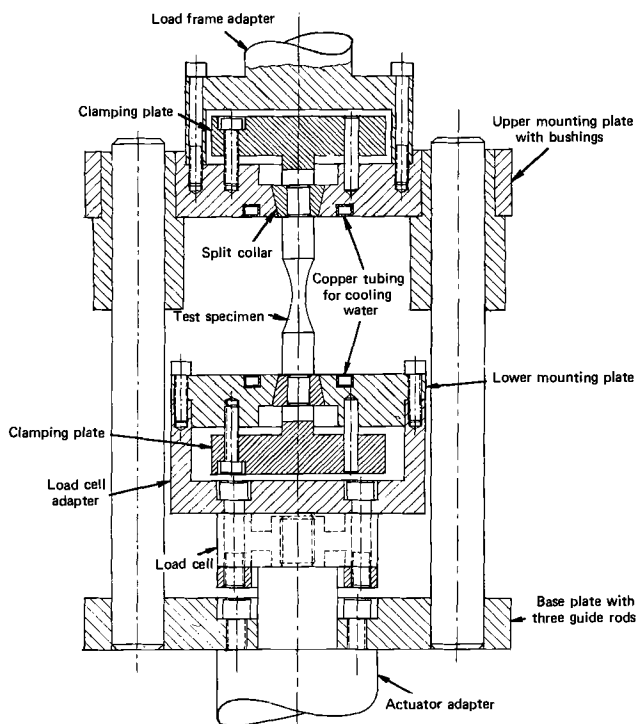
Assembly drawing of loading fixture with internal load cell.
